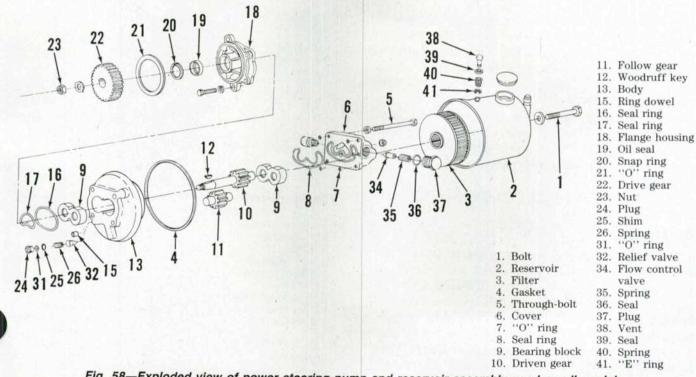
Exploded view of power steering pump and reservoir assembly used on all models.
